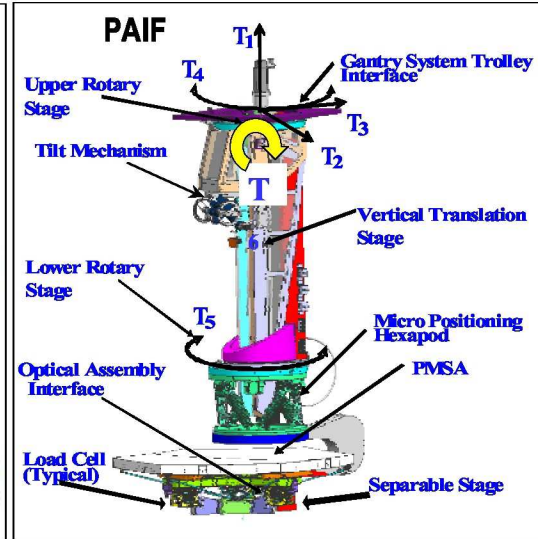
detail of the Primary Mirror Alignment and Integration Fixture (PAIF)
